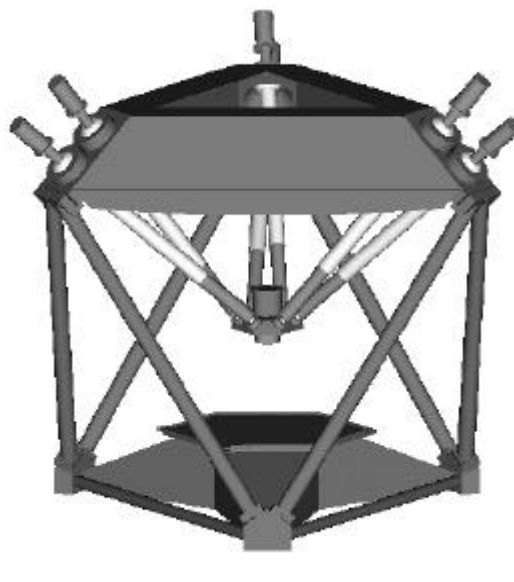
Solid model of Octahedral Hexapod machine installed at NIST (spindle motor not shown).
